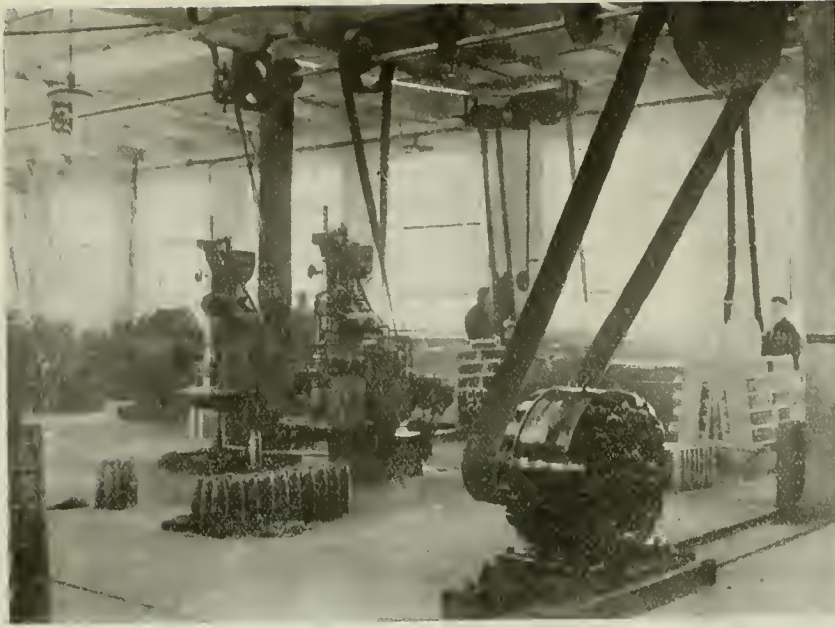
VIEW OF SIDE BAY SHOWING BALL-BEARING SHAFTING, DRILLS AND AUTOMATIC TURRET LATHES.
